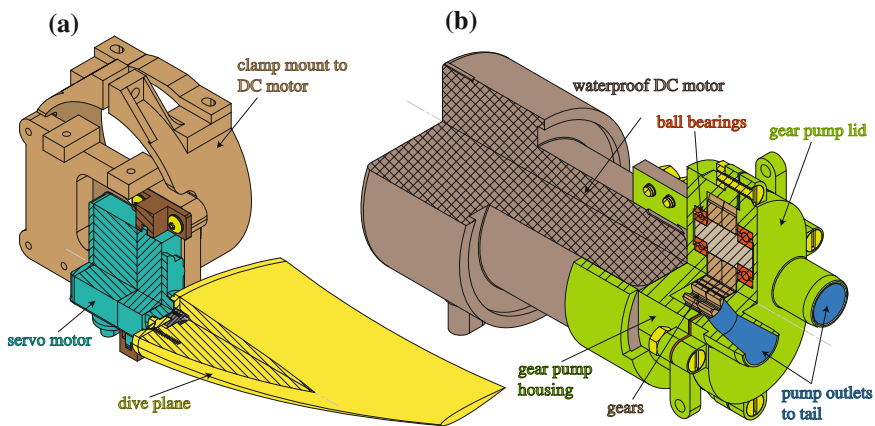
a Dive plane attached to waterproof servo and clamp mount, and b gear pump with dc motor
